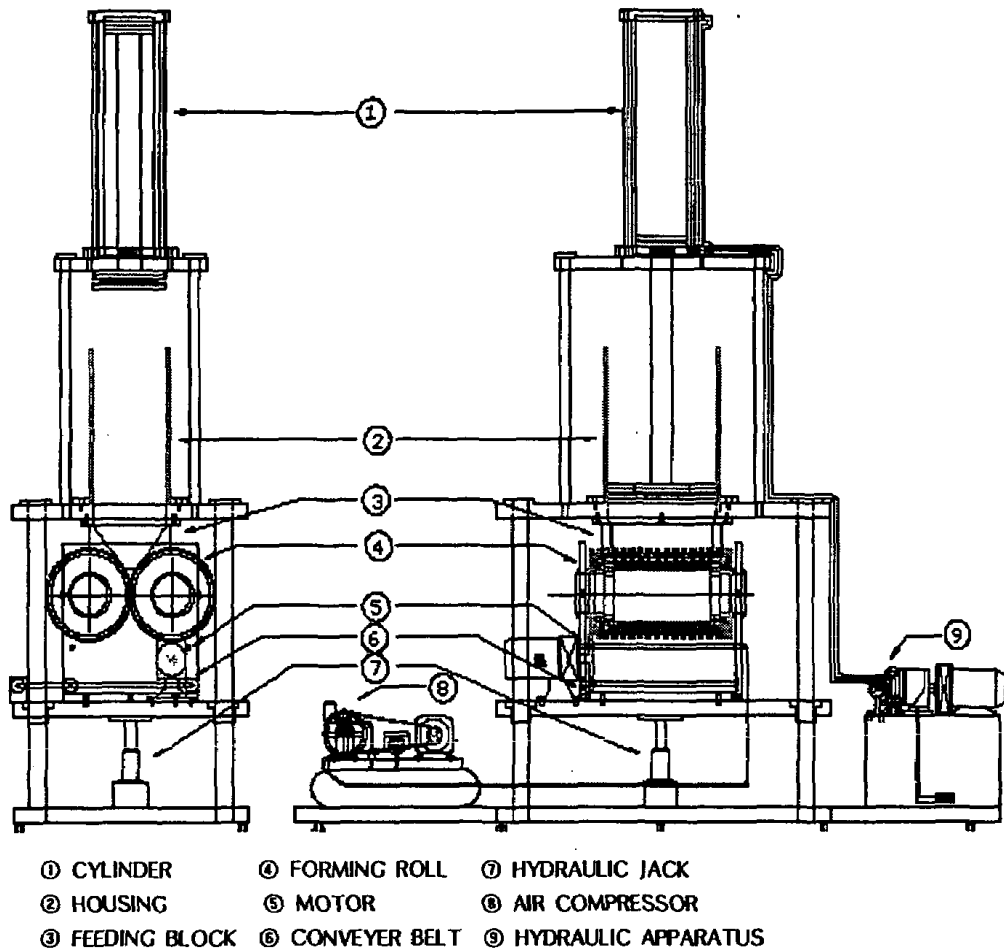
A schematic diagram of the prototype rice seed pelleting machine
